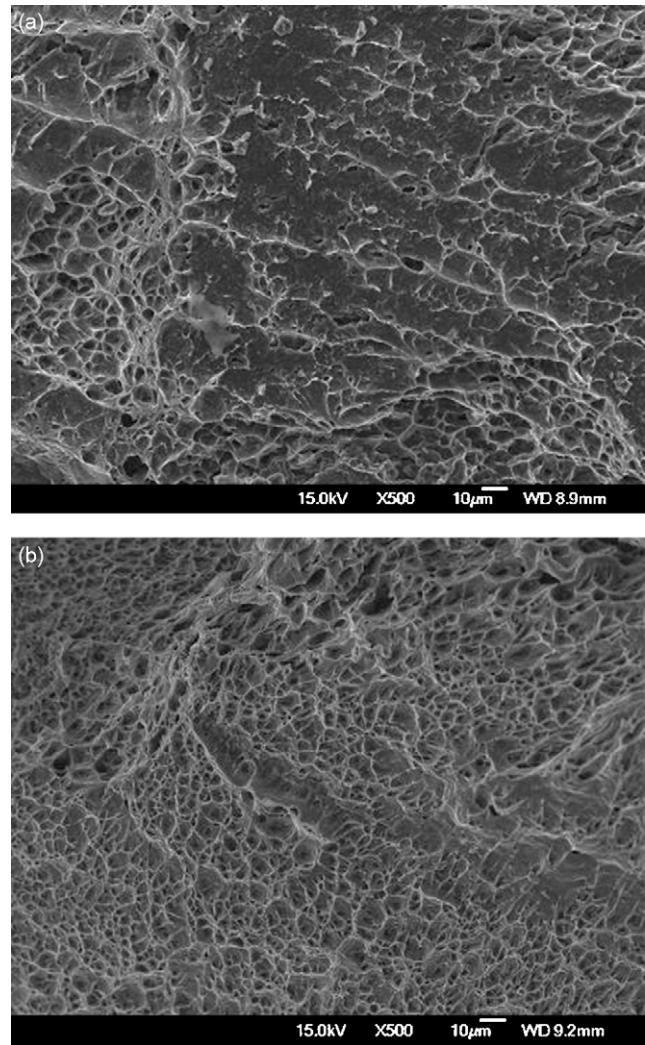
Fracture surfaces of the fatigue specimen (welding speed of 115 mm/min) tested at 70 MPa.
